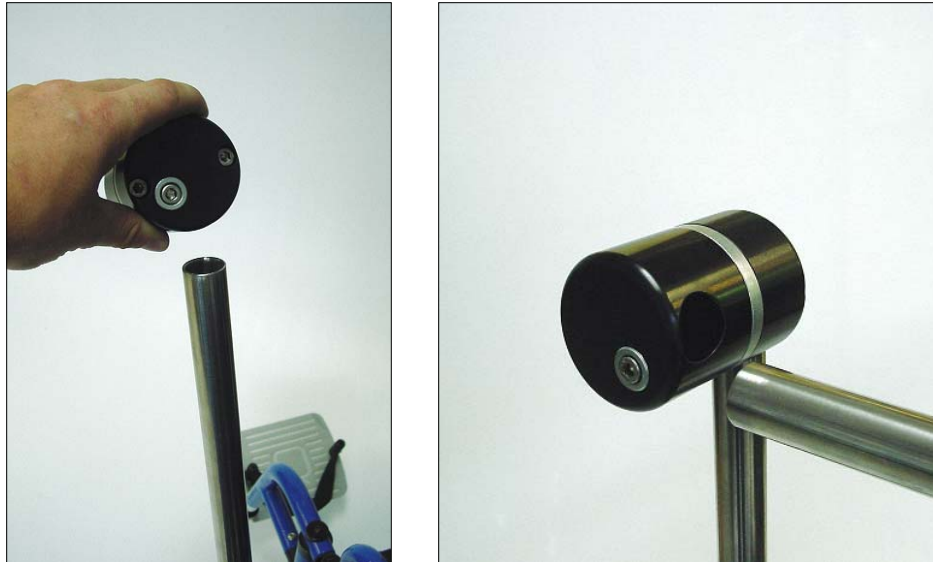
Slide the Side Tube and Horizontal Tube into the tube holes of the ELRH+RTHTM. Tighten the Pinch Clamps to hold the
